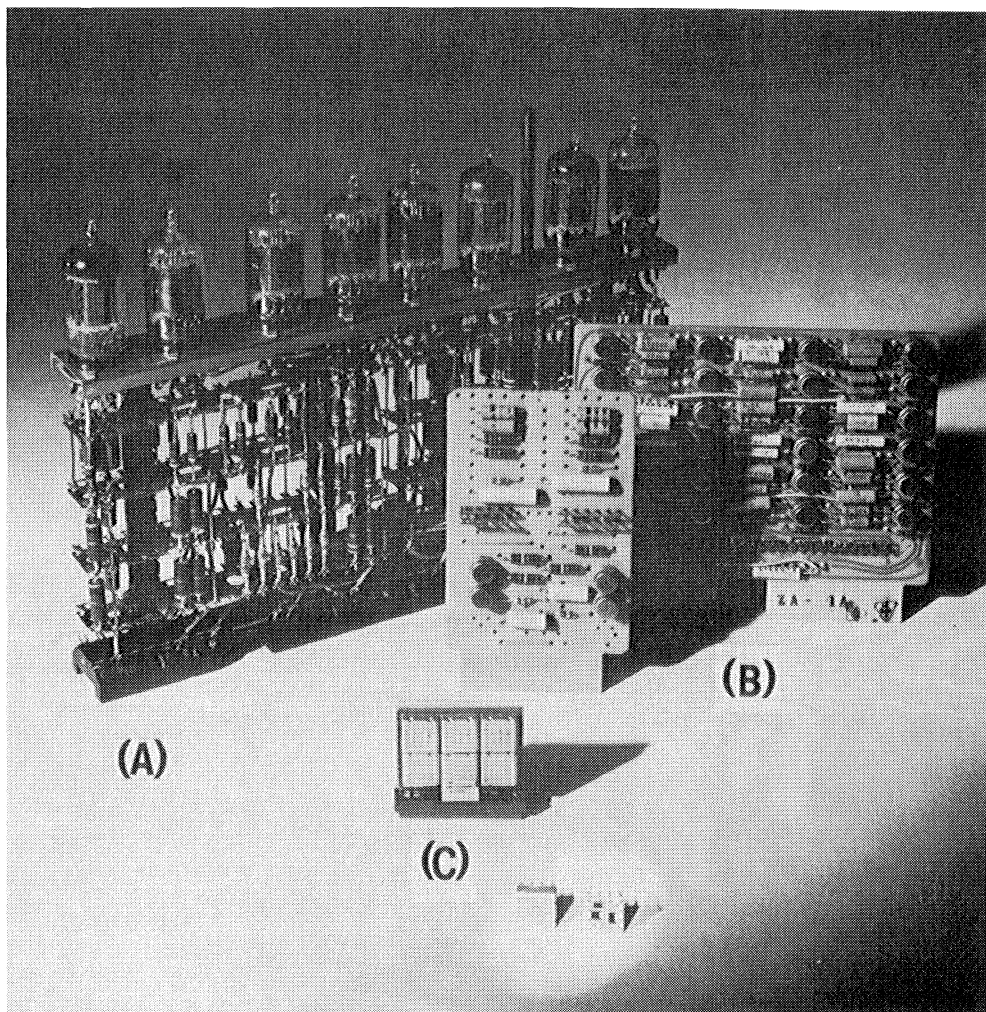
Packaging systems: (A) Wires, metal chassis and sockets, (B) epoxy-glass printed circuit boards, connectors and cables, (C) modules, cards and multilayer boards.
